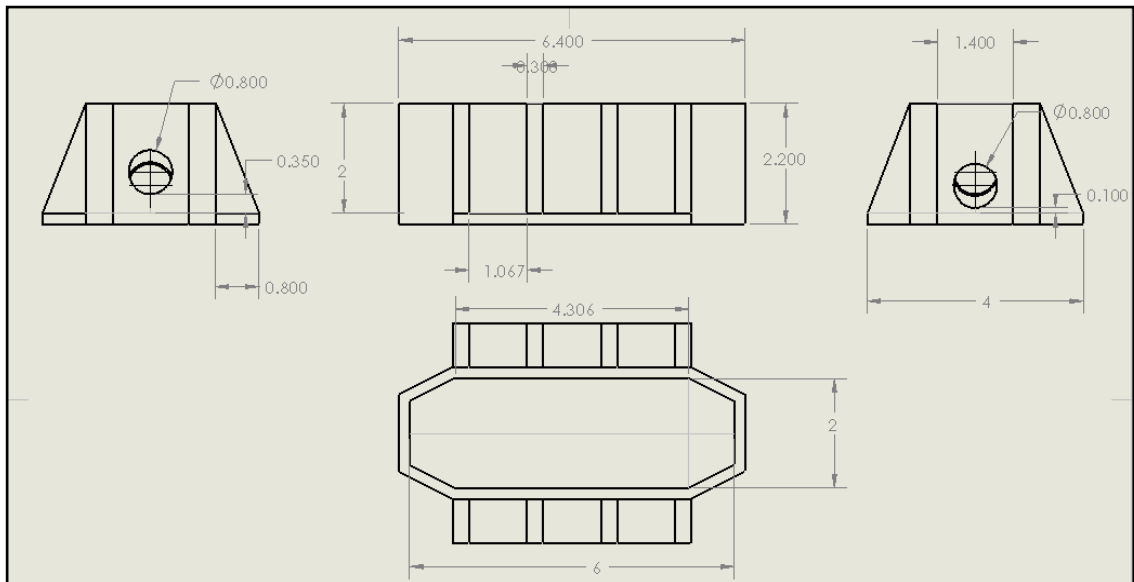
Double Tank Parshall Design 2D view (Tank 1)
